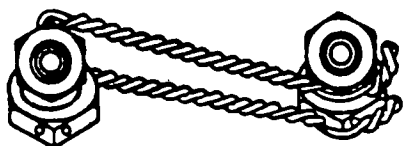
The proper method for wiring a standard fitting with check nut wired independently so that it need not be disturbed when removing the coupling nut.
